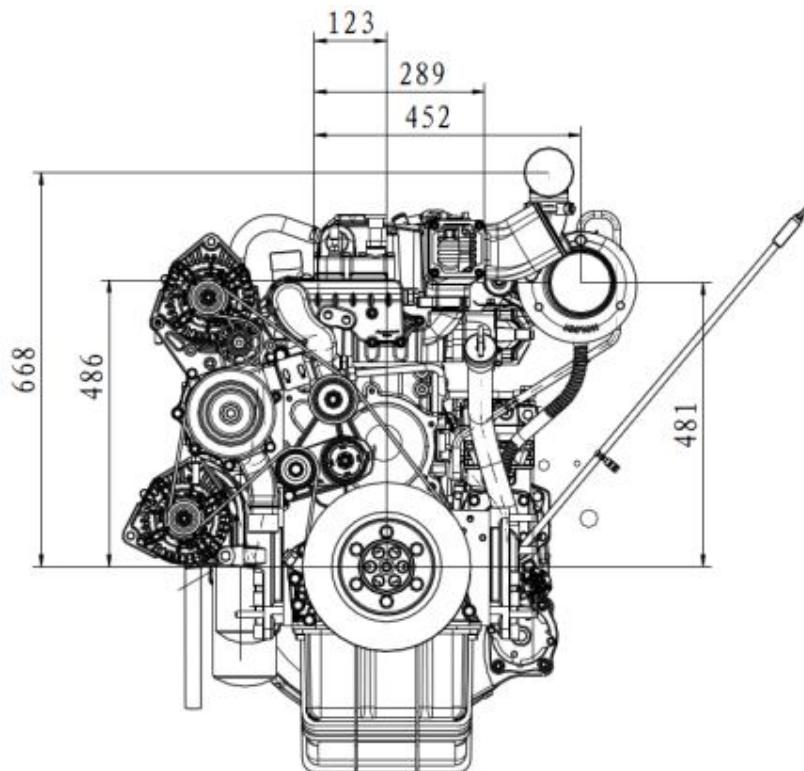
Front side of WP5 Euro IV-standard electronic oil pump diesel engine
